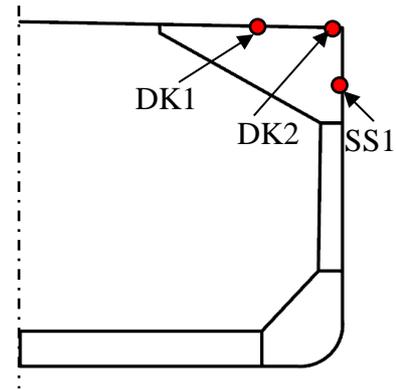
Representative mid-ship section showing the butt-welded plate joints with ids (DK1, DK2, and SS1)
